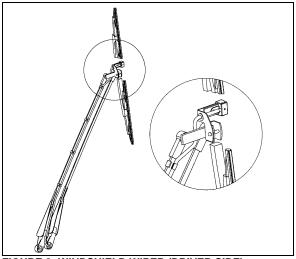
WINDSHIELD WIPER (DRIVER SIDE) 2332
